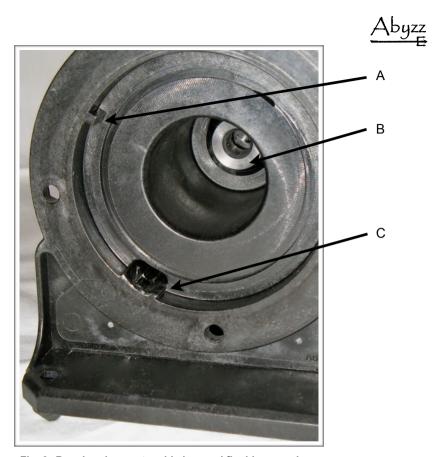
Rear bearing seat, guide lug, and flushing opening
